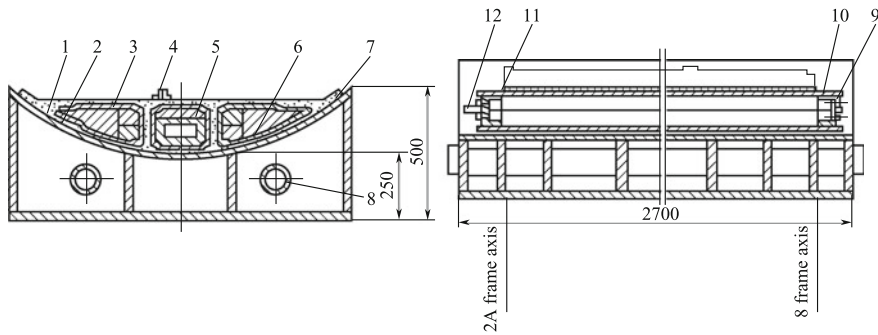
Top cabin box processing molds. 1 Part; 2 female mold; 3 rubber; 4 angle sharp; 5 cores; 6 walls isolating layers; 7 back strip; 8 steel pipe; 9 bolts; 10 back cap; 11 front cap; 12 handle
